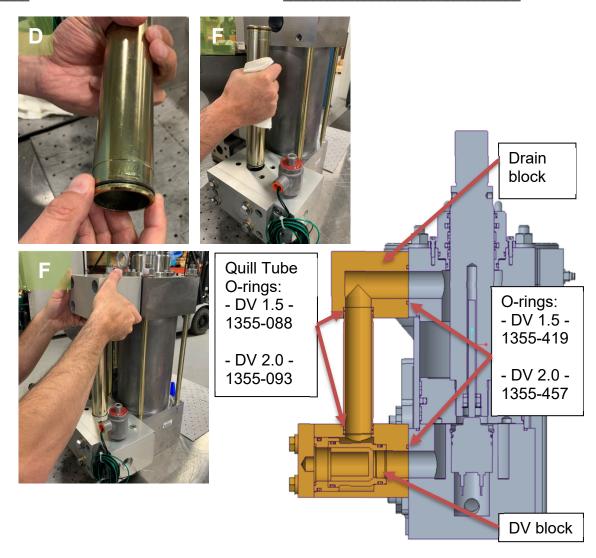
Install Dump Valve onto Cylinder, Fail Retract View
